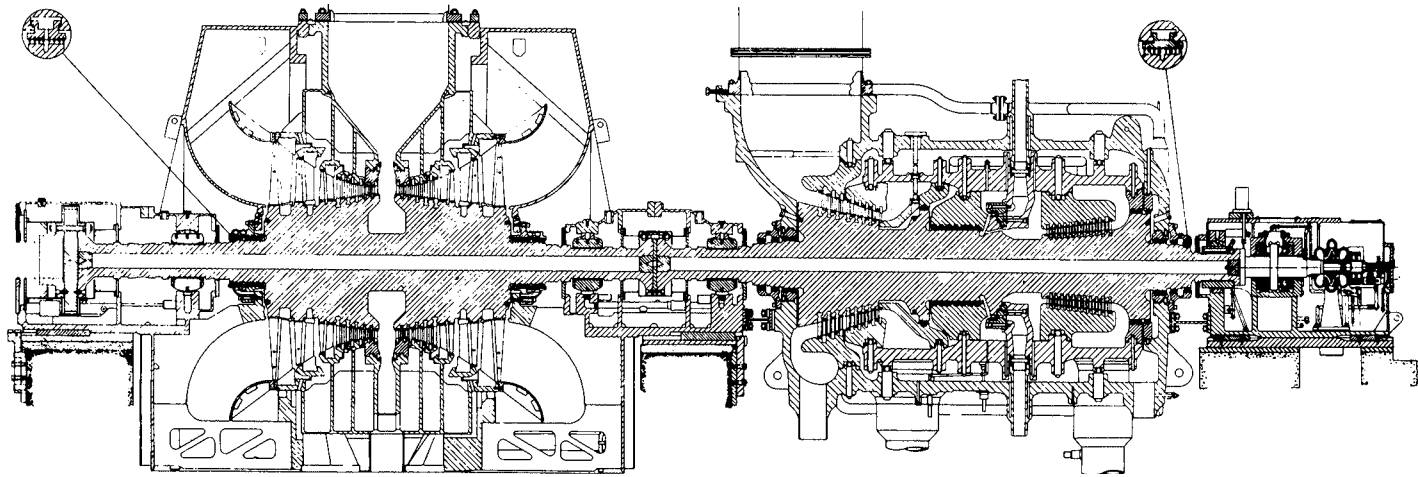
Cross Section of a 160,000-kW tandem-compound, double-flow reheat turbine. (*Westinghouse Electric Corp.*)
